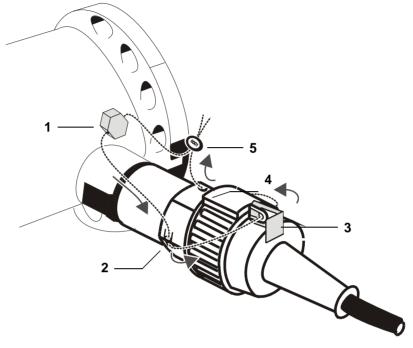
Sealing pulse generator 2159 (flat plug) with gearbox
